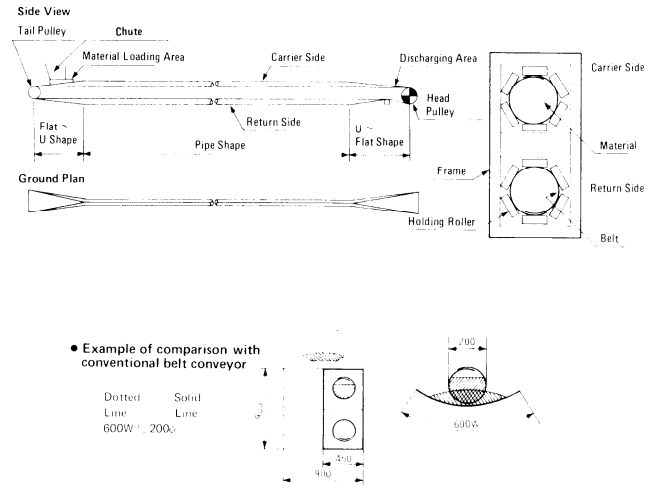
Pipe conveyor configuration. Belting is restrained in tubular cross section (courtesy: Pipe Conveyor Co. Ltd.).
